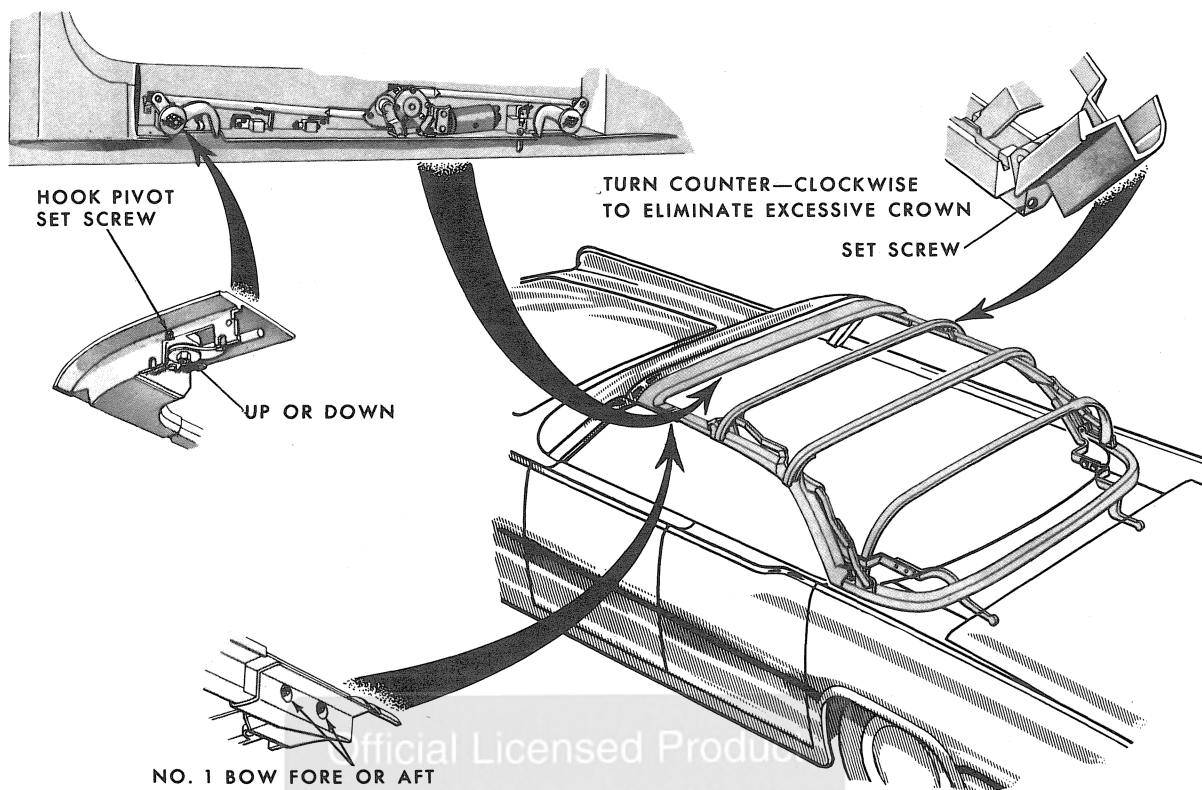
No. 1 Bow and Lock Hood Adjustment
